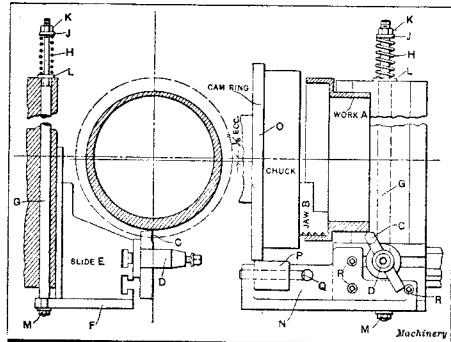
Eccentric Turning Attachment for Engine Lathe
